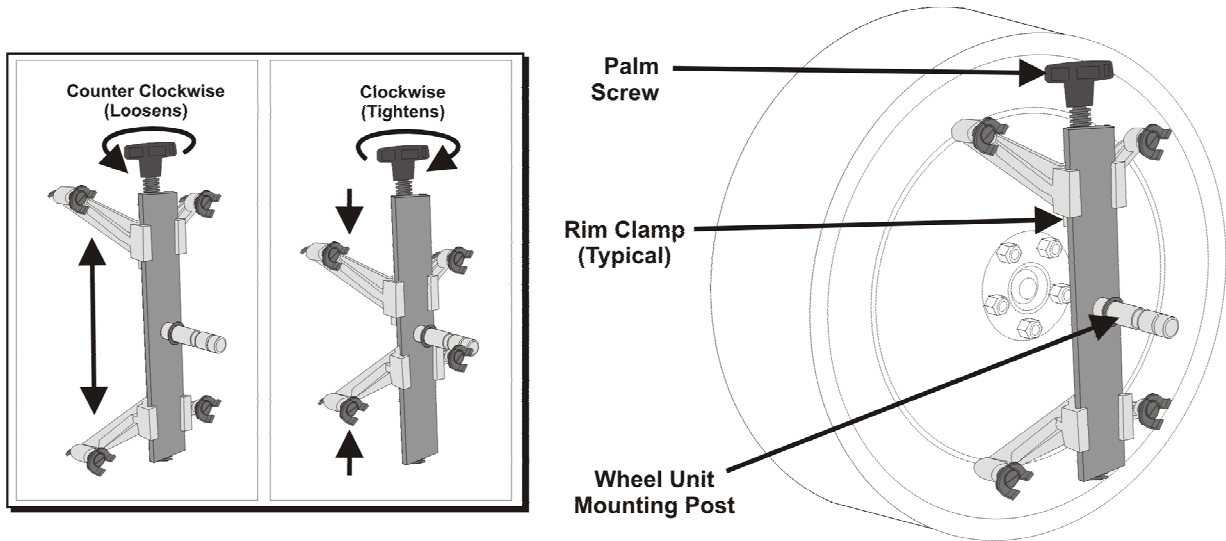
Applying Rim Clamps to Vehicle Wheel
